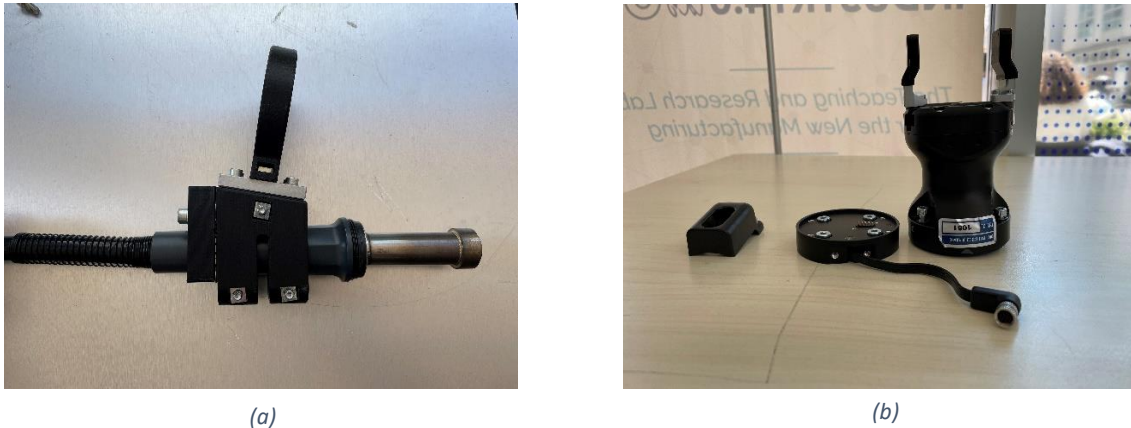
The air desolder (a) and the Hand-E gripper (b)
